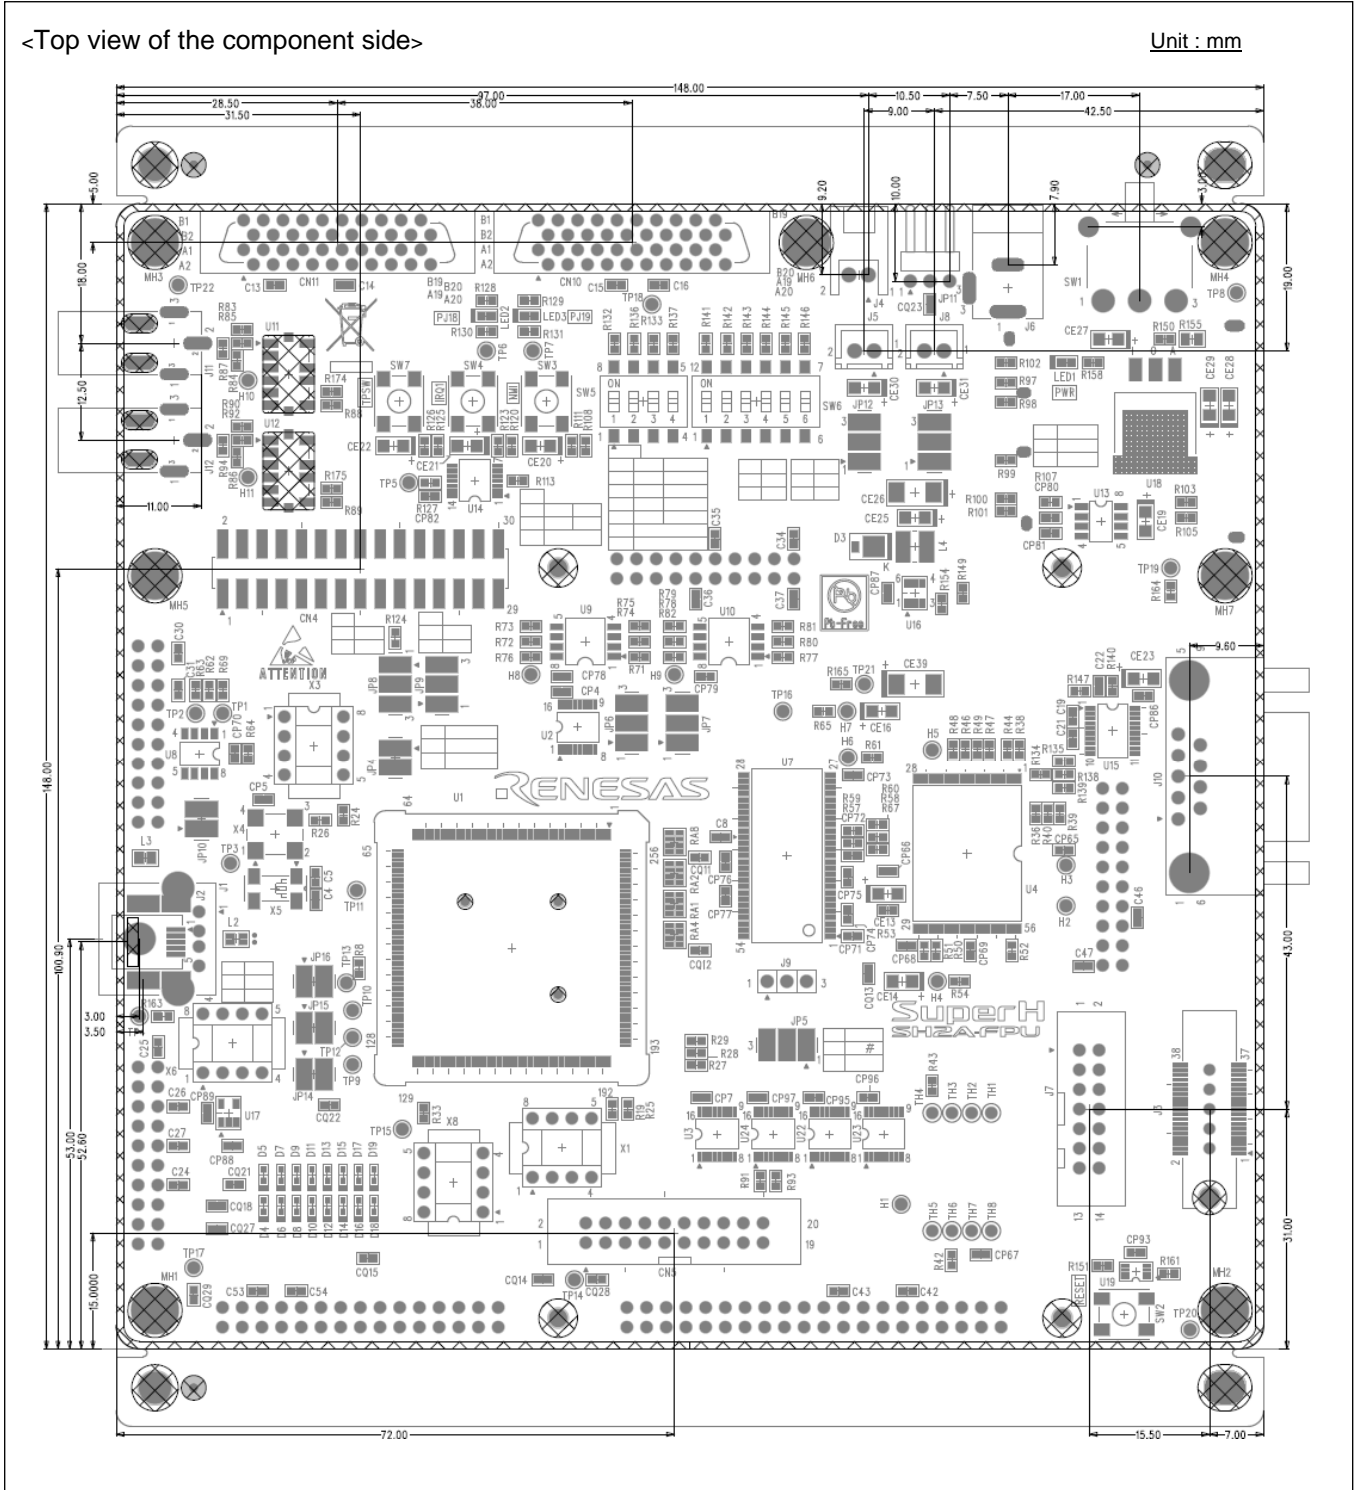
R0K572690C000BR Dimensions 2 (Top view of the component side)
